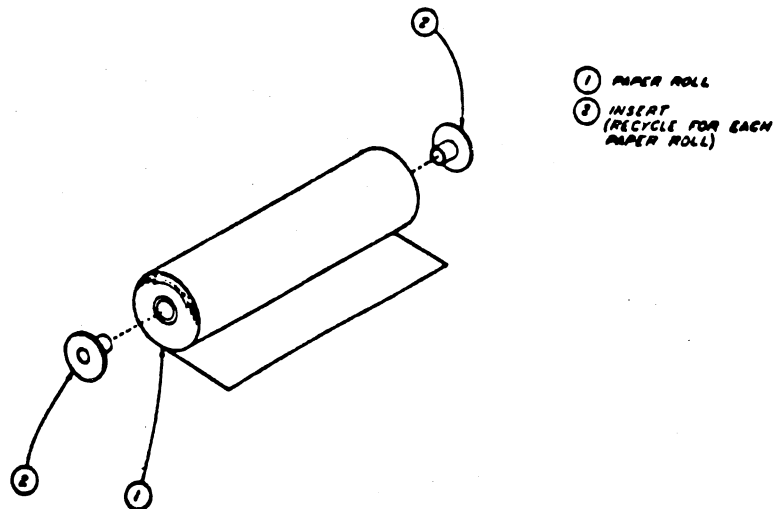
A Inserting End Caps, Digital Part No. 74-27237-0-0
